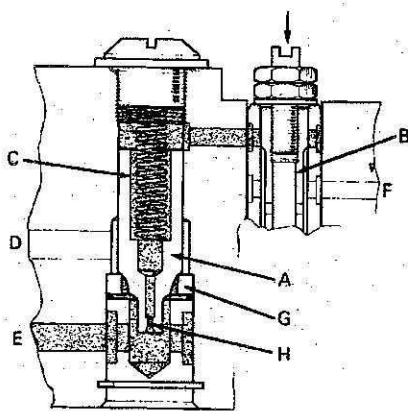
View showing pressure balanced valve operation. With spool valve (B) blocking passage from top side of valve plunger (A), pressure above valve is maintained via orifice (H) to same pressure as below valve in passage (E), thus spring (C) holds plunger on seat (G) closing outlet passage (D).
